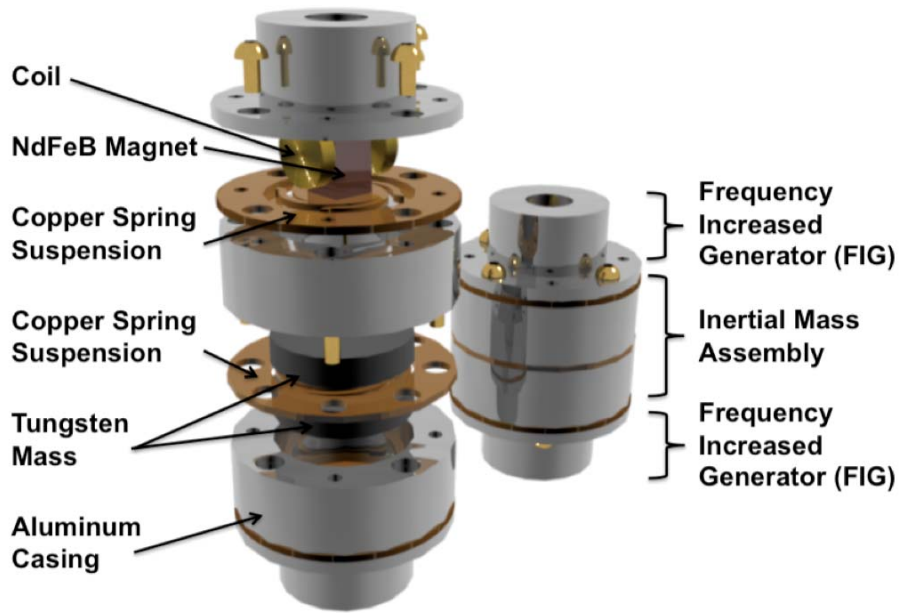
Exploded view of the Gen 2 electromagnetic PFIG showing the structure of the device, components, and assembly.
